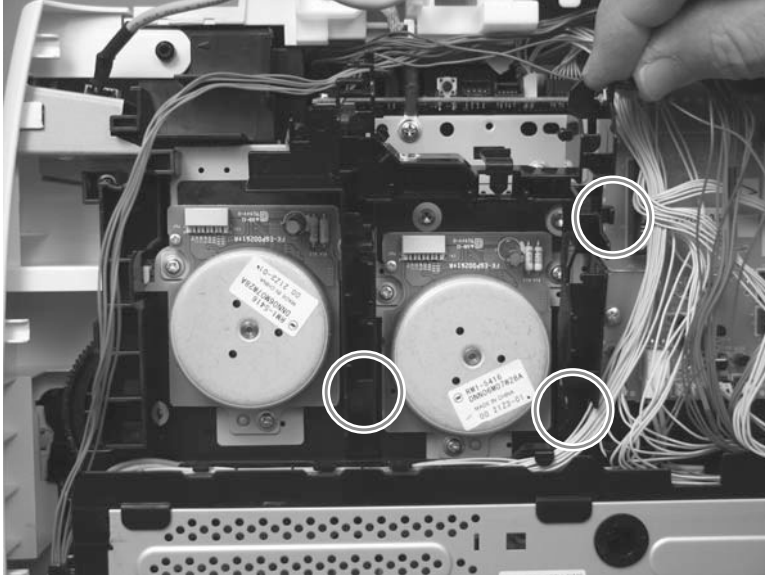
Remove motor M1 and motor M2 (5 of 5)
